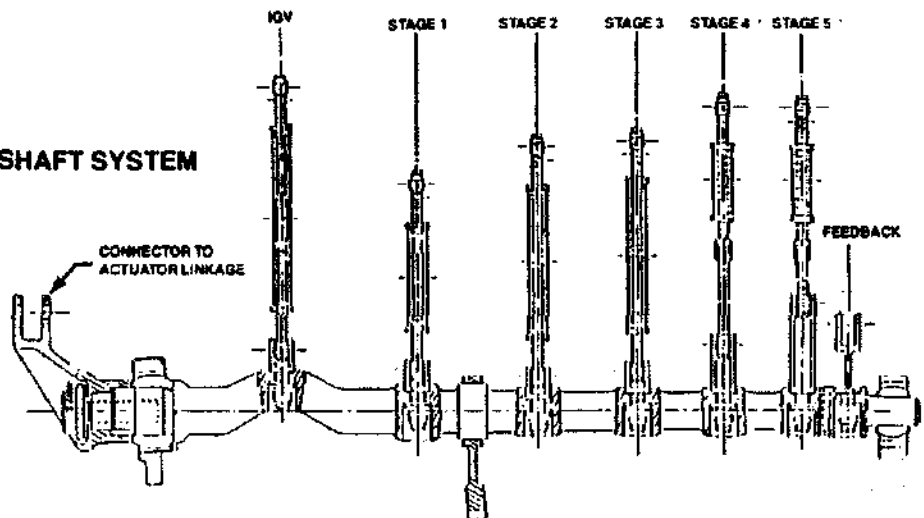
Linear and Torque Type Bellcrank Mechanisms
